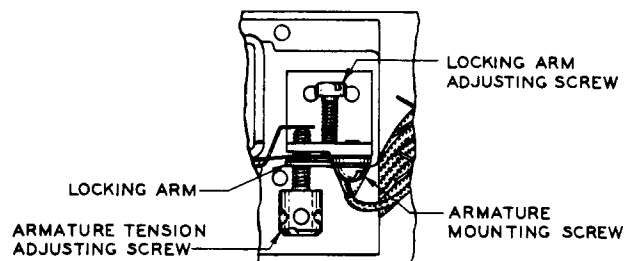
B - NO. 267A AND 267B RELAYS EQUIPPED WITH A LOCKING ARM ADJUSTING SCREW.
